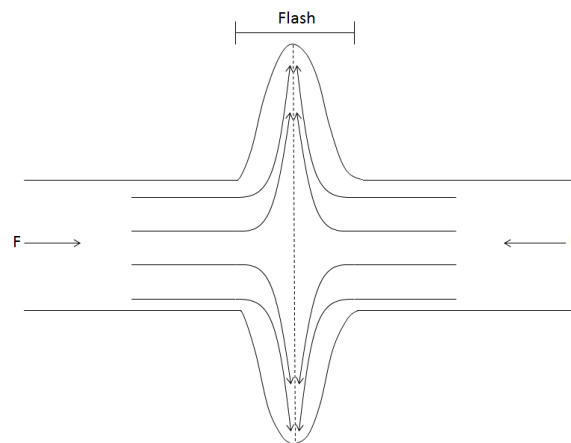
The process of cold pressure welding by the use of upsetting. From [17].
